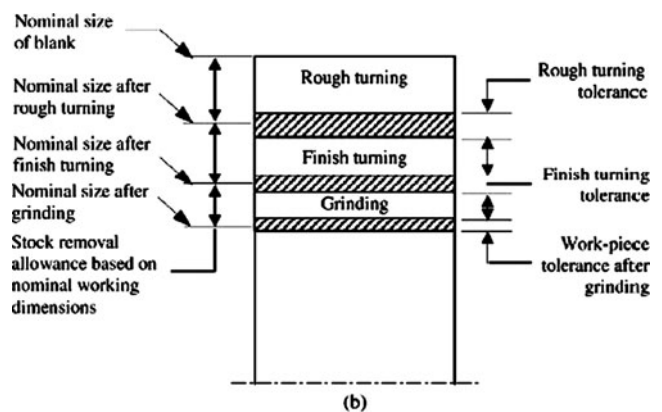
Machined layers and manufacturing tolerances [25]
